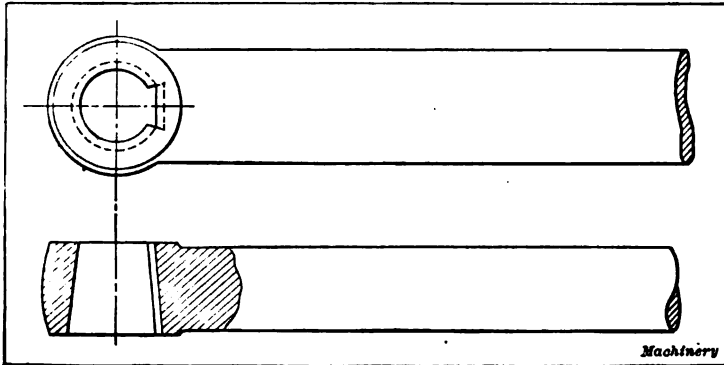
Bicycle Crank, in Hub of which Dovetail Keyseat is Broached
